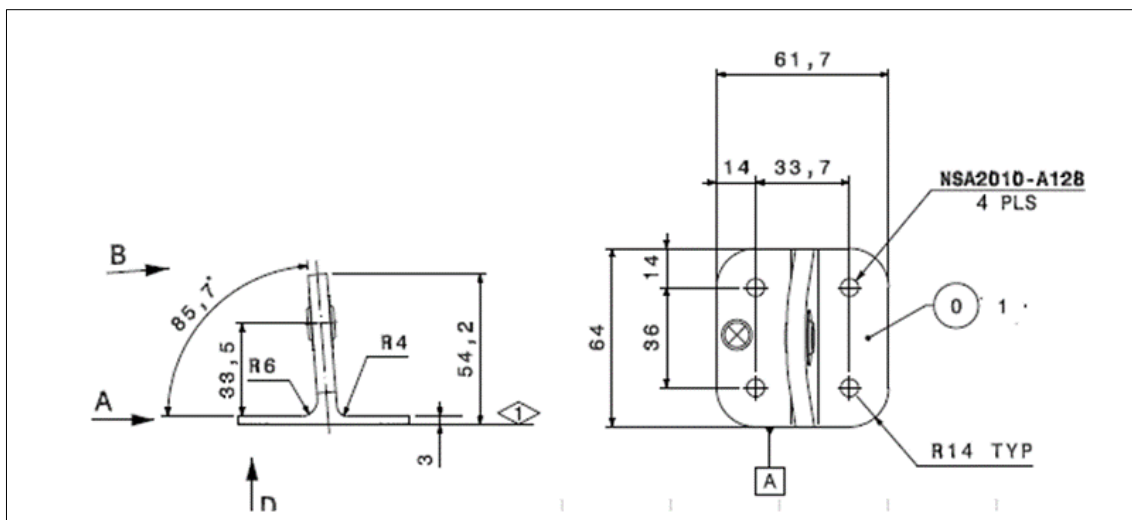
Airbus lug component, 15-5 PH Stainless Steel (dimensions in mm)
